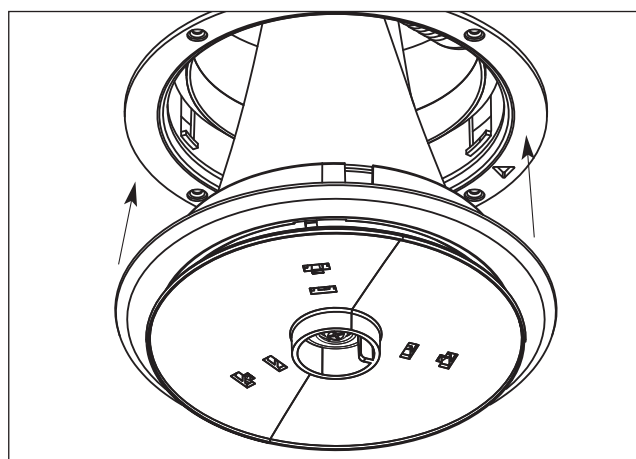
Fit damper assembly to main body by aligning the triangle symbols, then press together and twist damper assembly clockwise, (you will hear a click when damper assembly is in a 'locked' position.
